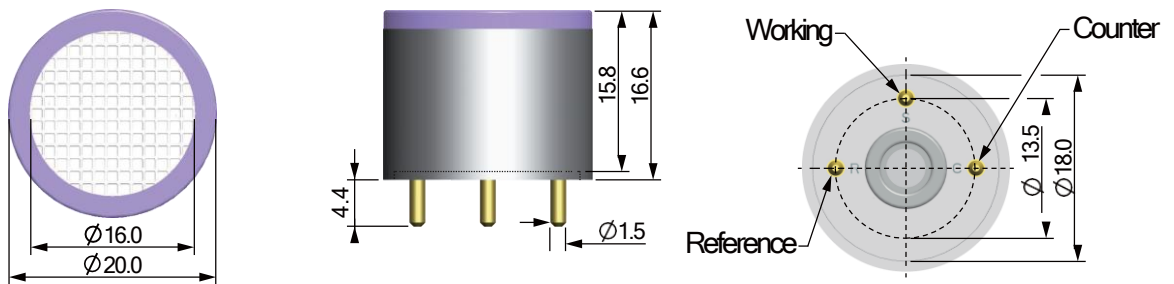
Product dimensions in mm. All tolerances ± 0.10 mm unless otherwise stated
